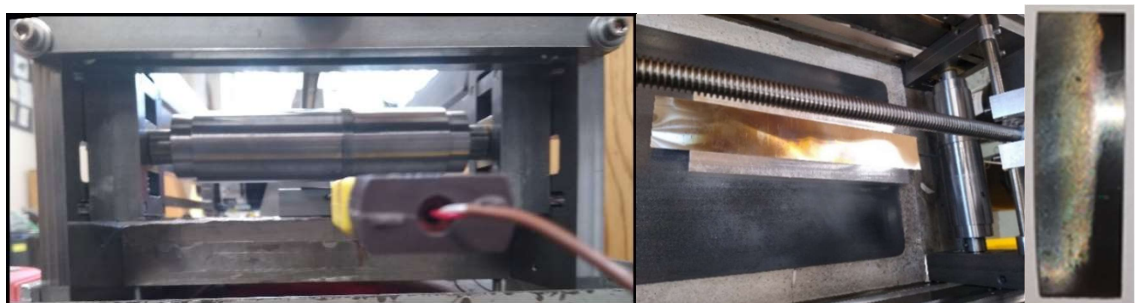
The MG ring off center on the mandrel taper, the Ni mold on the Al block and the half-embossed ring segment.
